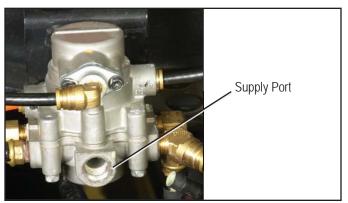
EXTERNAL SINGLE CHECK VALVE REMOVED
